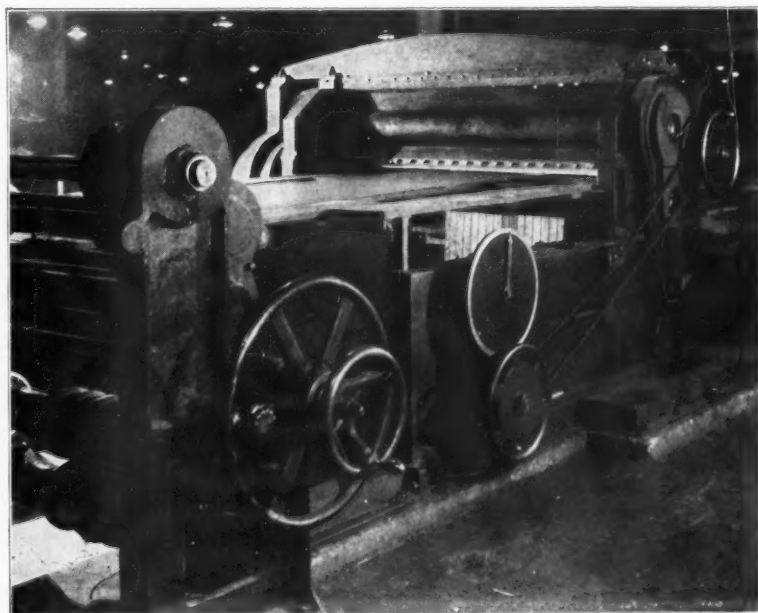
Another view of the Swift paper board fabricating machine. Certain parts of this element must be provided with means for automatic lubrication to prevent wear and possibility of costly readjustments.
